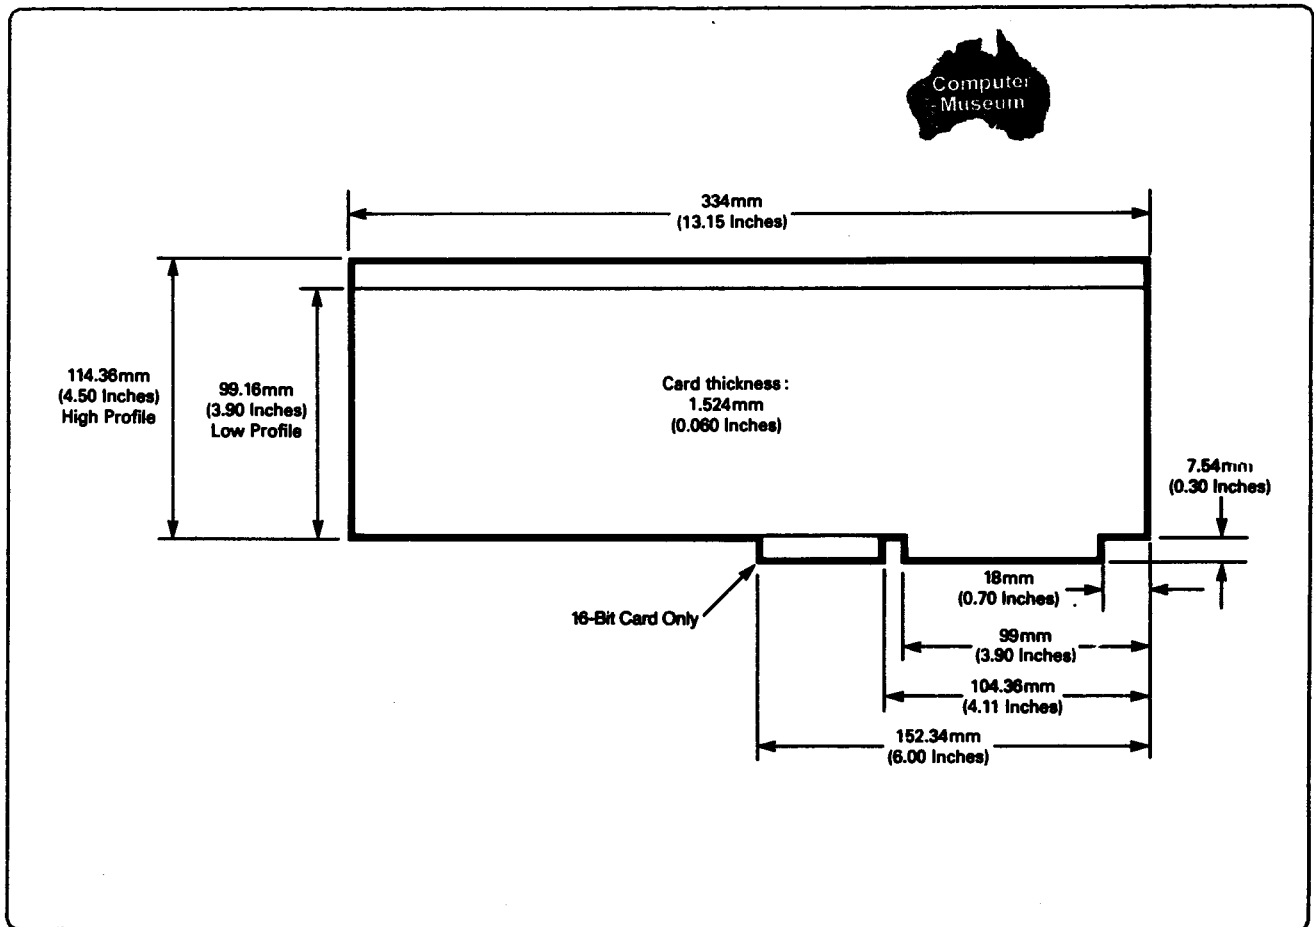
Industry-Standard I/O Accessory Card Dimensions
